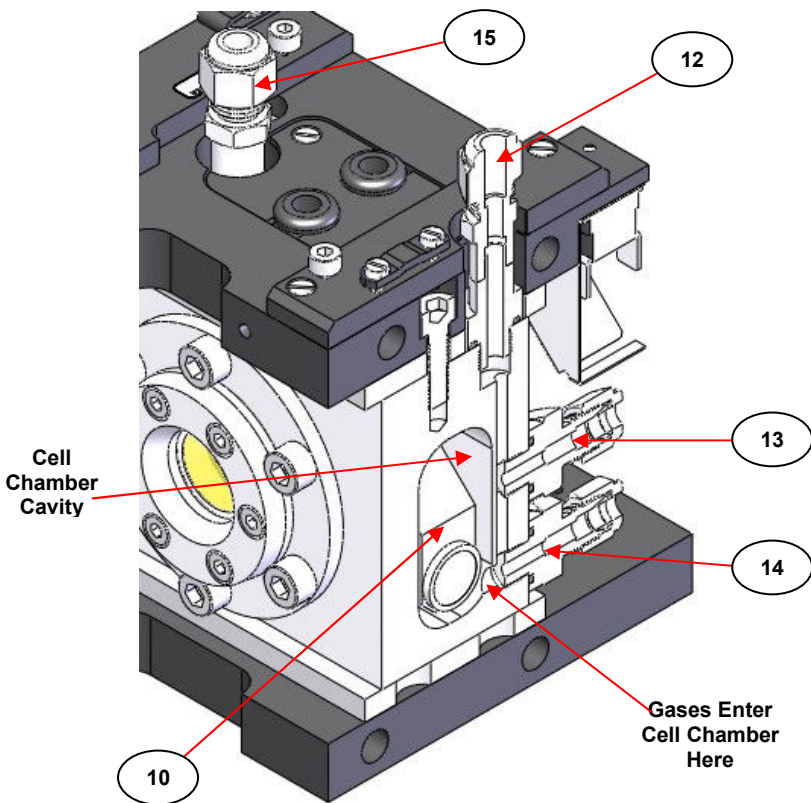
Cross Sectional Cutaway View of Inlet Ports Merging
